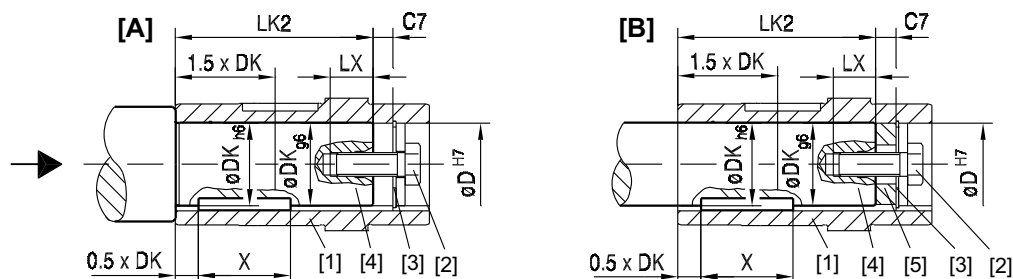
Customer shaft with contact shoulder (A) and without contact shoulder (B)
